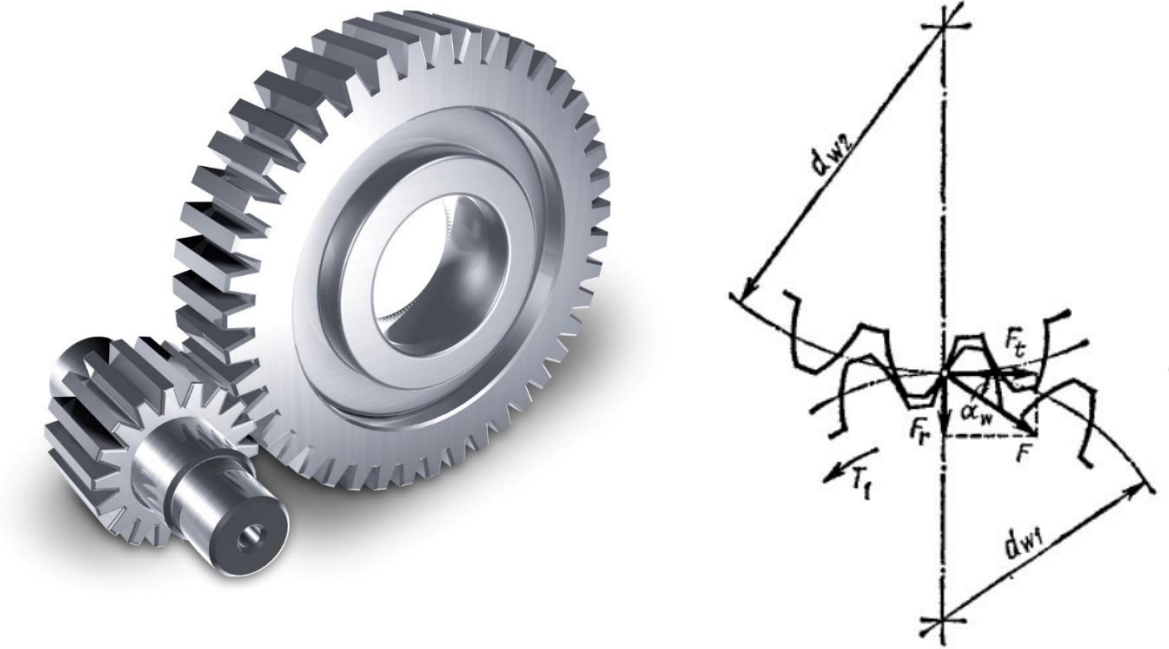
Cylindrical spur gear and the scheme of forces arising in its meshing
